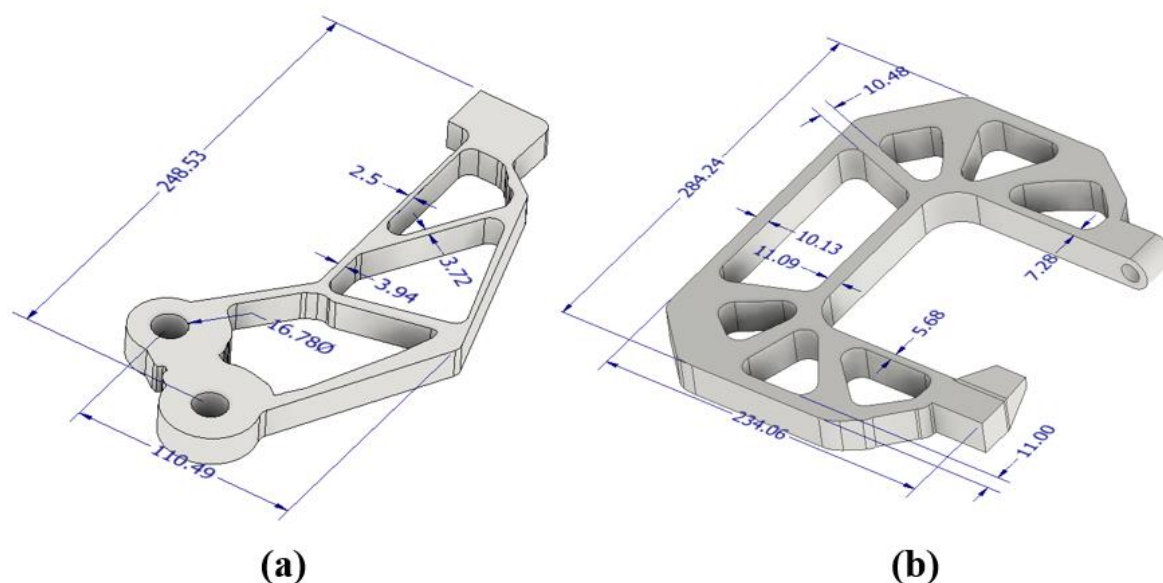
Chosen parts as a case study and their respective dimensions: (a) Jaw Gripper; and (b) C-Frame of a Resistance Spot Welding Gun (dimensions in mm)
